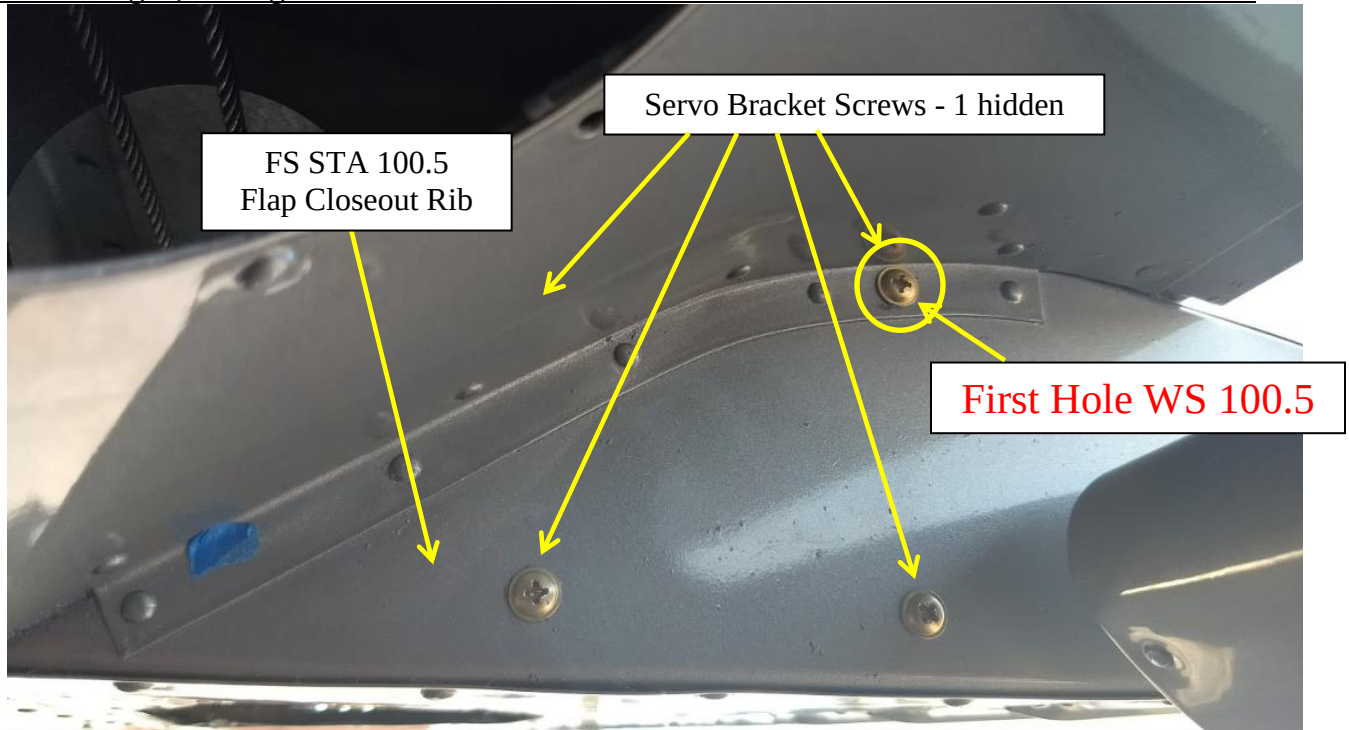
VIEW LOOKING OUTBOARD AT STA 100.5 RIB
